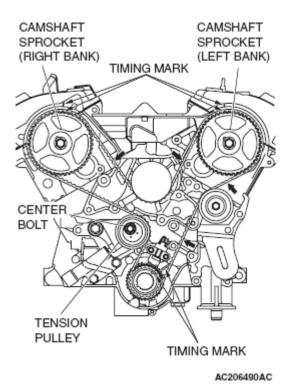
Turning Camshaft Sprocket (Right Bank)
